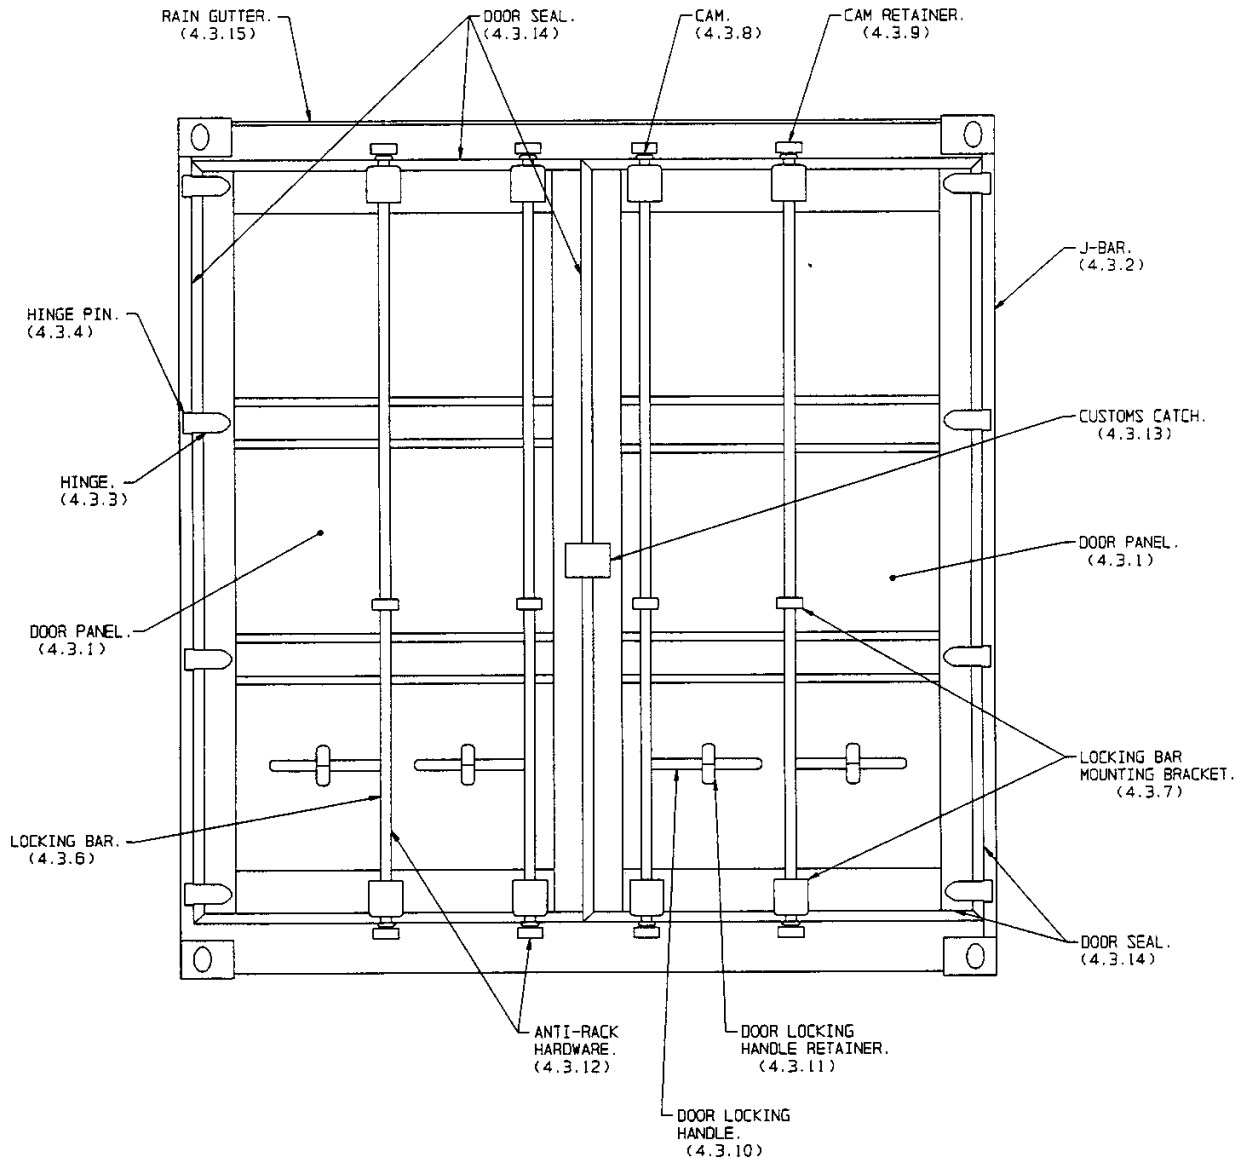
TYPICAL REAR END DOOR ASSEMBLY
